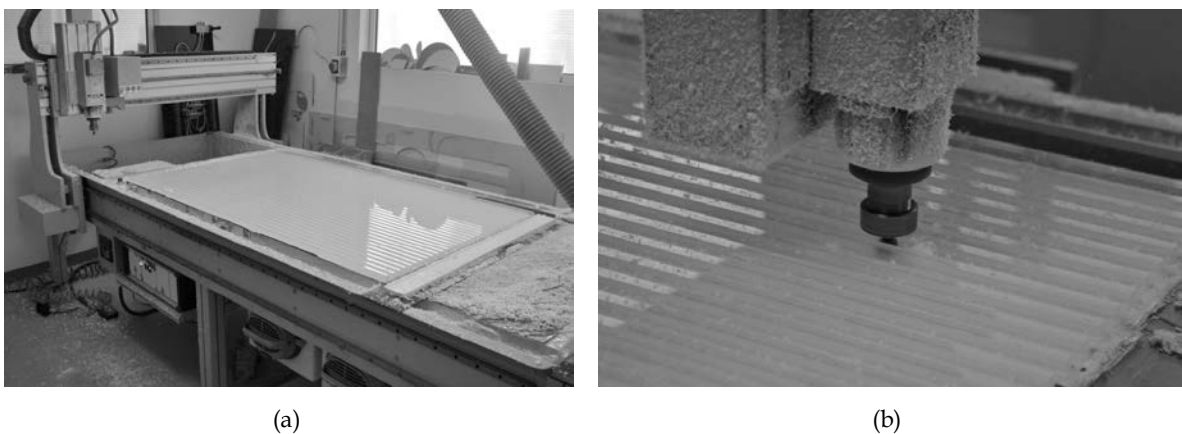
CNC milling machine used for the production of the acrylic bars (a) and standard 45° tip tool used during the process (b).
